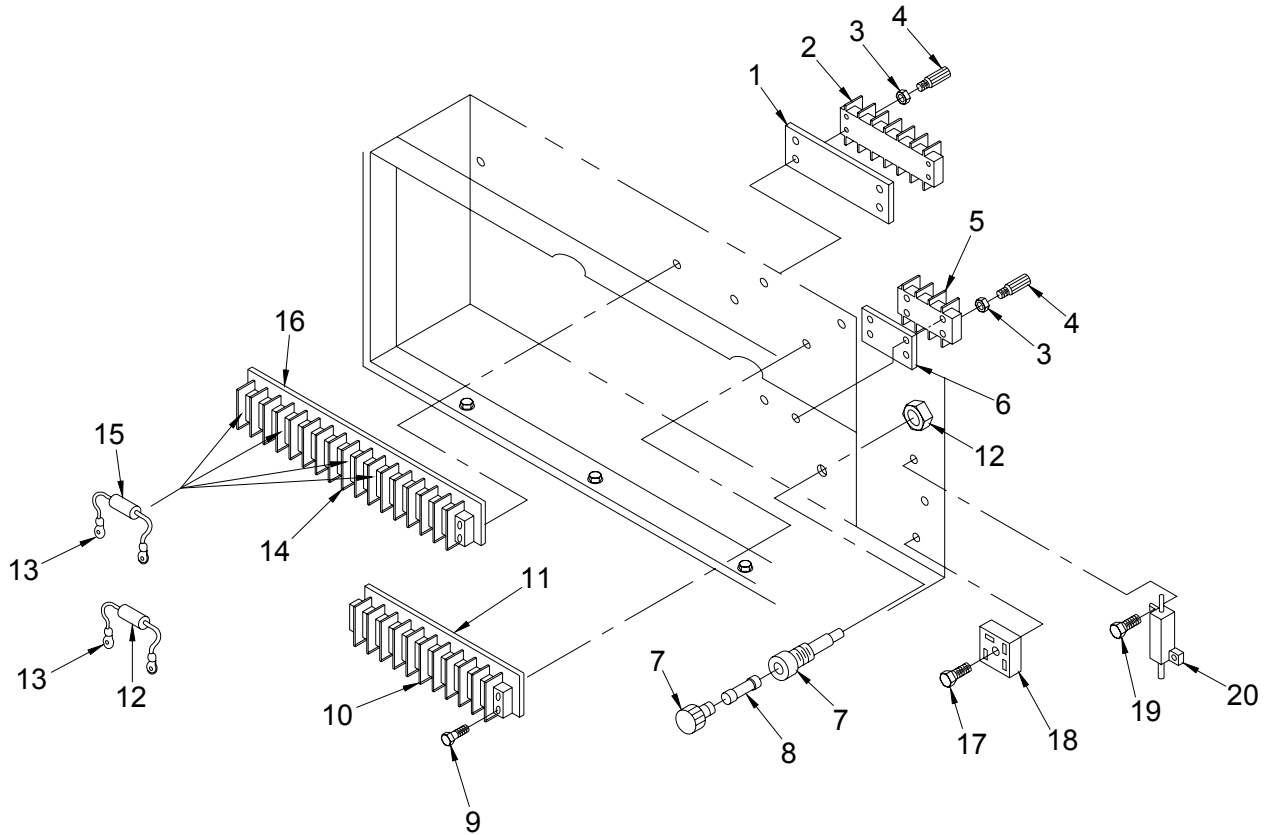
CONTROL BOX ASSEMBLY/CONTROL PANEL ASSEMBLY, 400 HZ (SHEET 2 OF 2)
